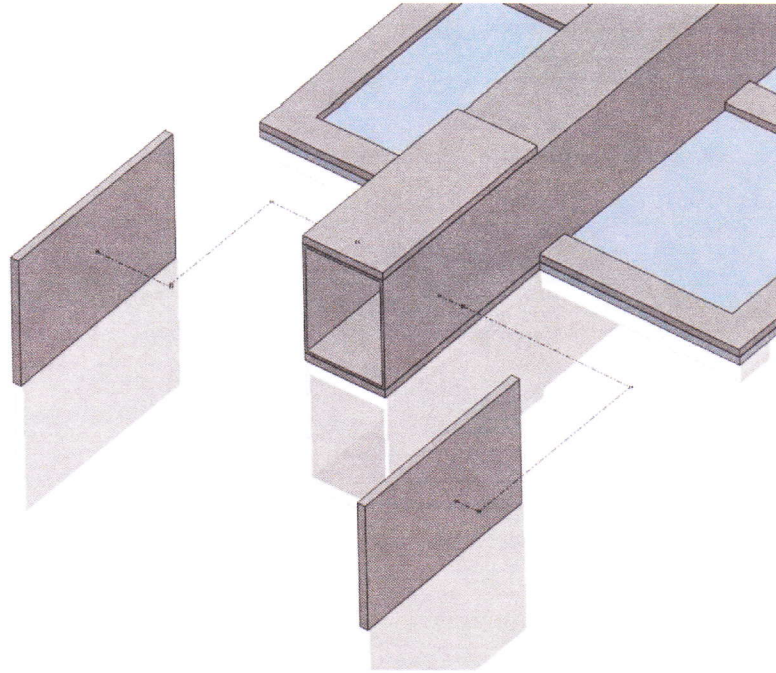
Front End of Beam Honeycomb Sandwich Panels
